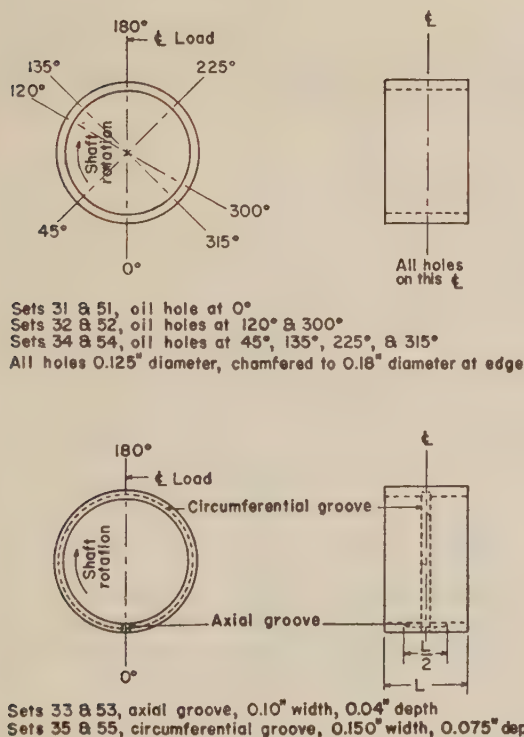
ARRANGEMENTS OF OIL HOLES AND GROOVES IN BEARINGS
